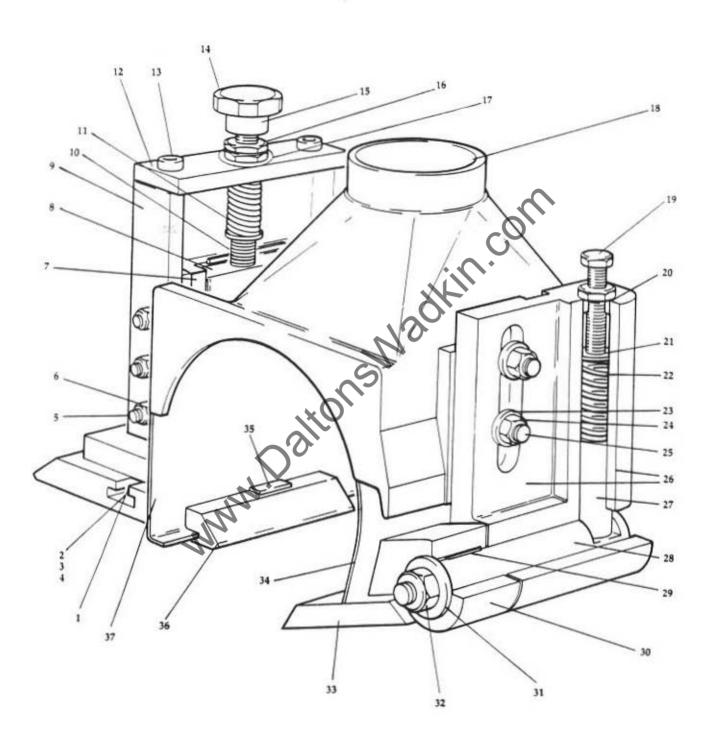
TOP HEAD CHIPBREAKER, PRESSURE PAD AND EXTRACTION HOOD
